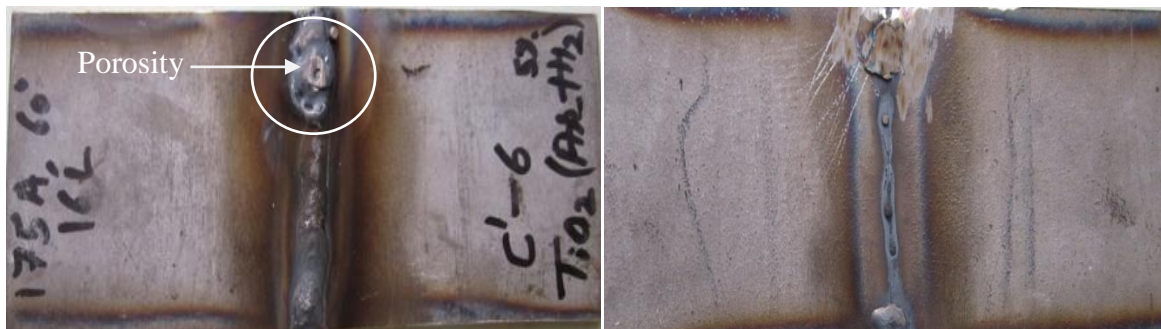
Weld bead appearance (top and bottom) of Sample-6 (C'-6) of A-TIG welding of AISI 304 under Ar+5%H₂ shielding
